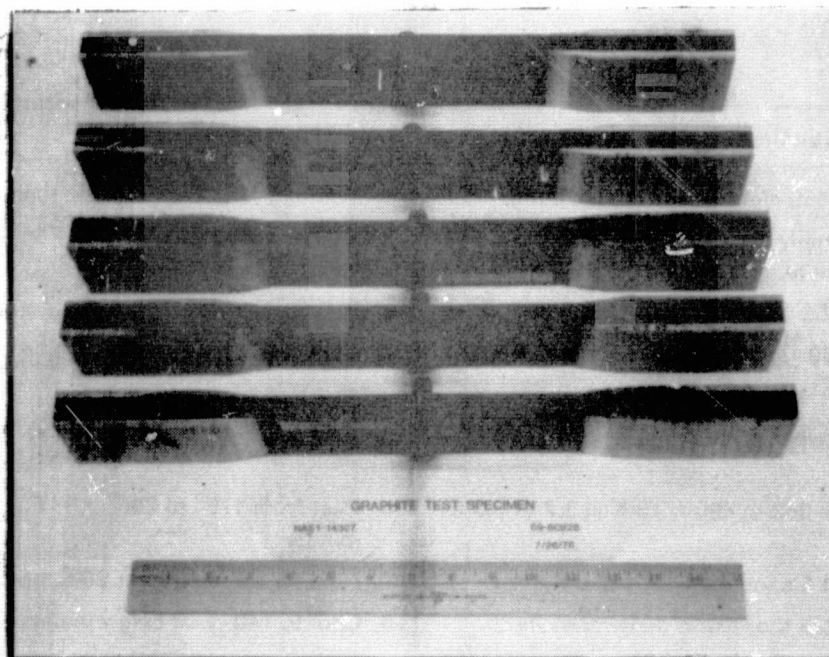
Unloaded Hole Graphite Test Specimen, Drawing 69-60928
